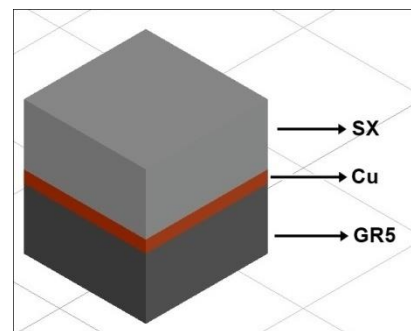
Schematic view of samples prepared for diffusion welding.
